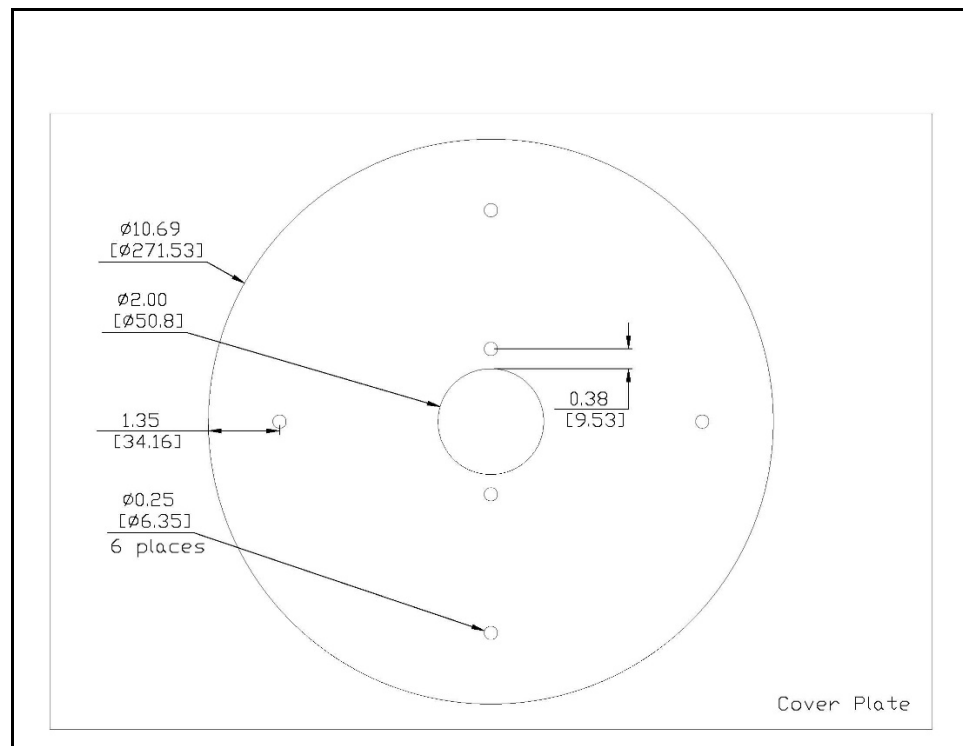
Light trap cover plate – material: 0.18 [4.5] HDPE. Dimensions: Inches [mm]
